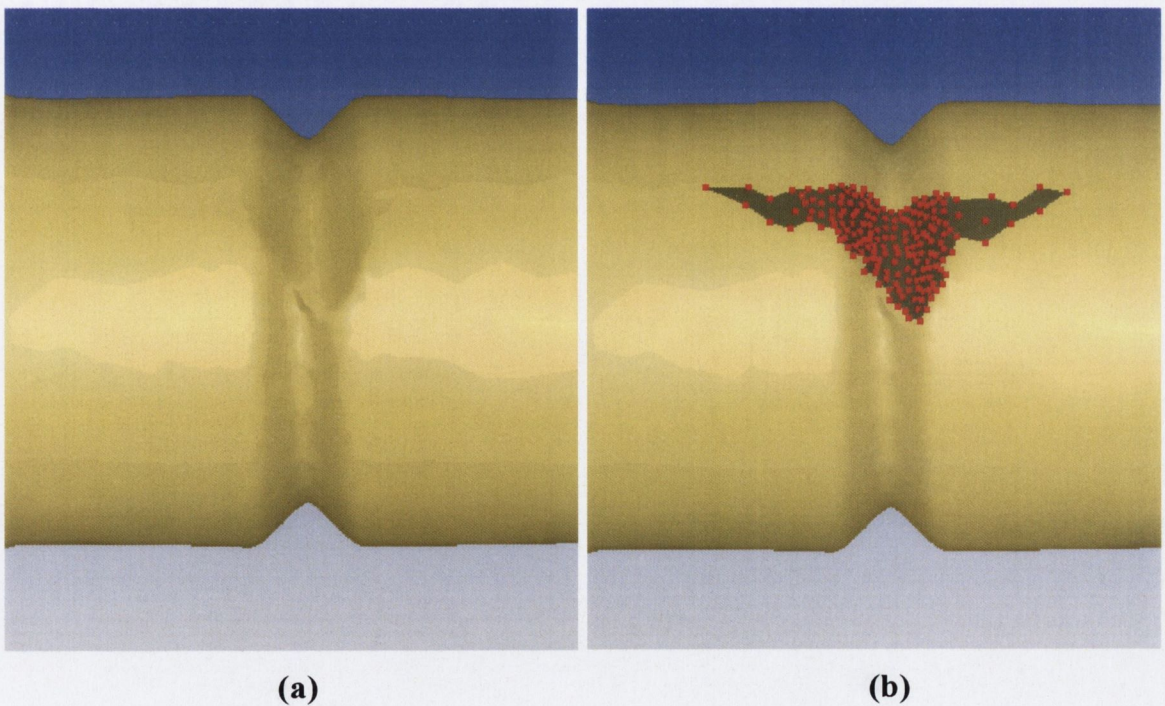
(a) Illustration of the first groove form and (b) area of contact between the workpiece and the top die, after 360° workpiece rotation.
